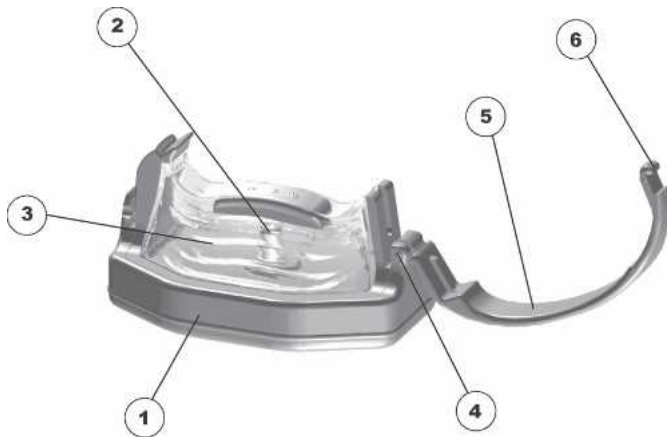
1, casing; 2, piston; 3, silicone membrane; 4, hinge; 5, counter piece/clip; 6, locking clip.
